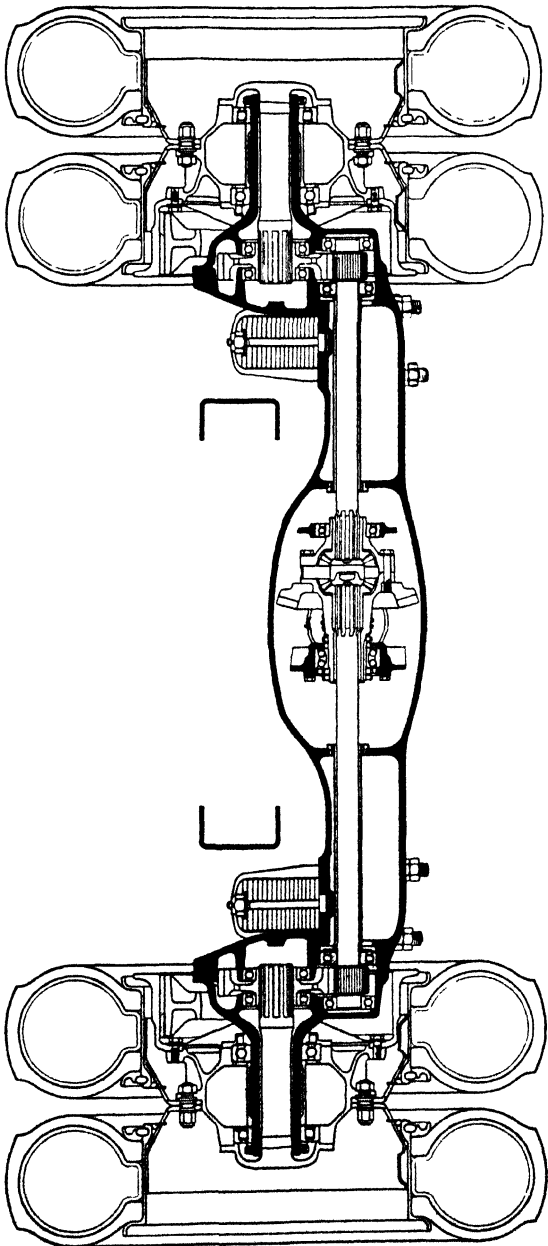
Drop-Type Bus Axle with Second Reduction by Spur Gears at Wheels
